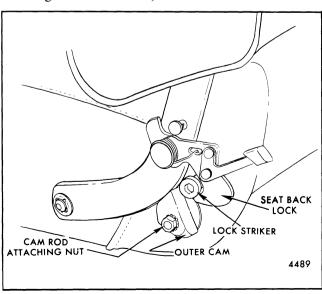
Adjustable Drivers Seat Back - Inner Side -Chevrolet "F" Styles
